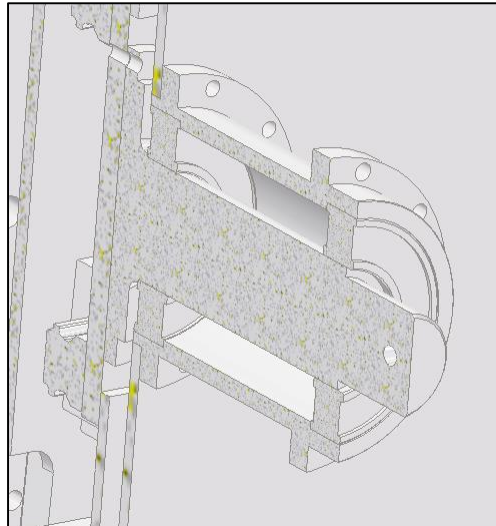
Cross section of Wisconsin Tooling trunnion assembly (University of Wisconsin, 2001).
